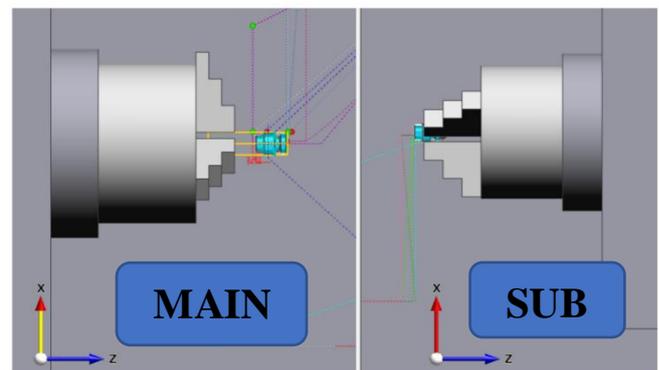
Machining space - view of the main spindle "MAIN" and the auxiliary spindle "SUB" of MAZAK HQR 150 MSY
